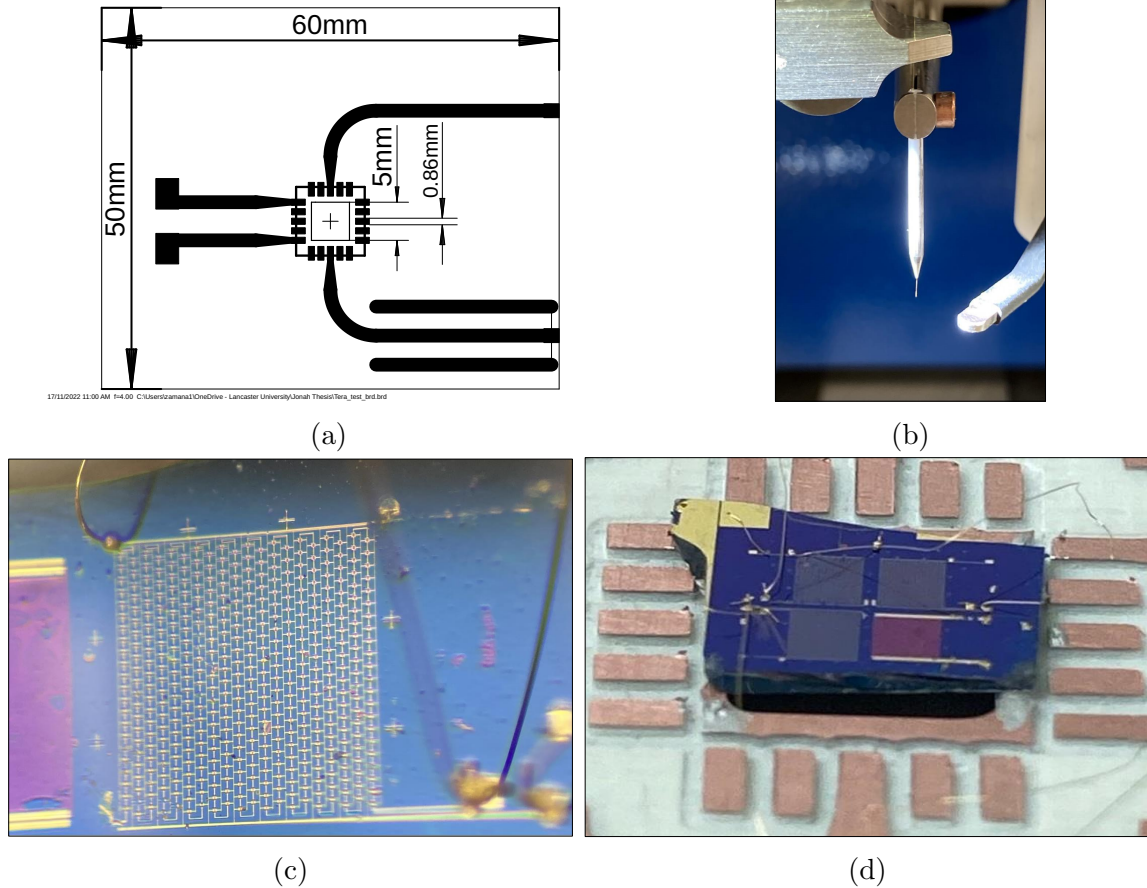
(a) PCB circuit design. (b) Inserted Au wire through a motorized wire clamp and ceramic tool tip. (c) Bonded array. (d) Bonded and mounted device.
